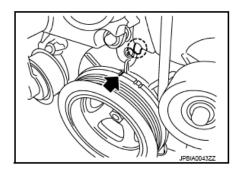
Locating Timing Mark On Crankshaft Pulley Courtesy of NISSAN MOTOR CO., U.S.A.
